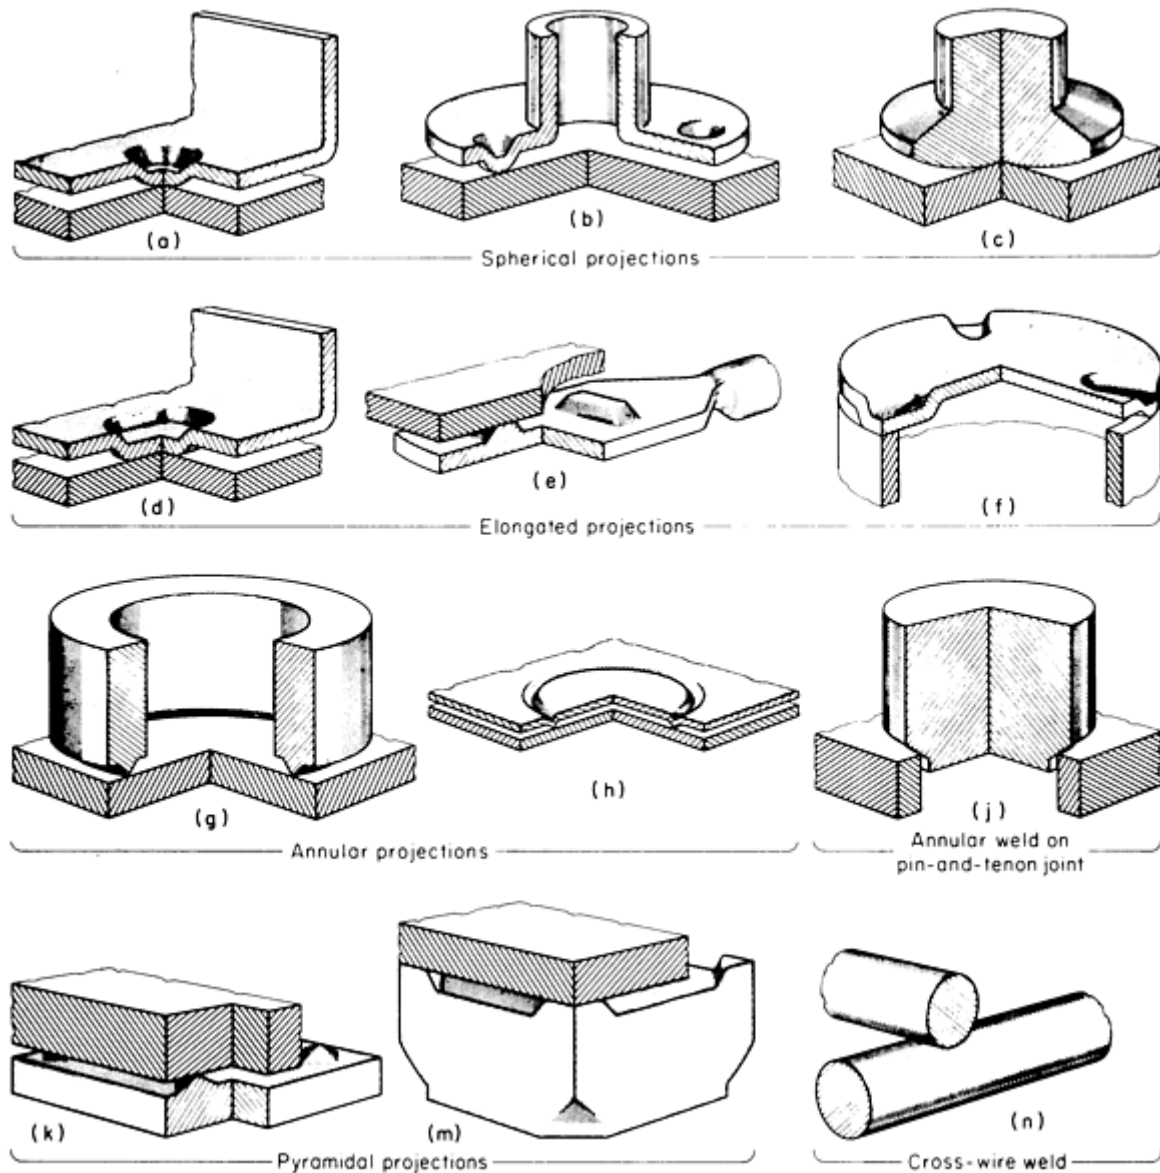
DIFFERENT PROJECTION-WELDING CONFIGURATIONS
